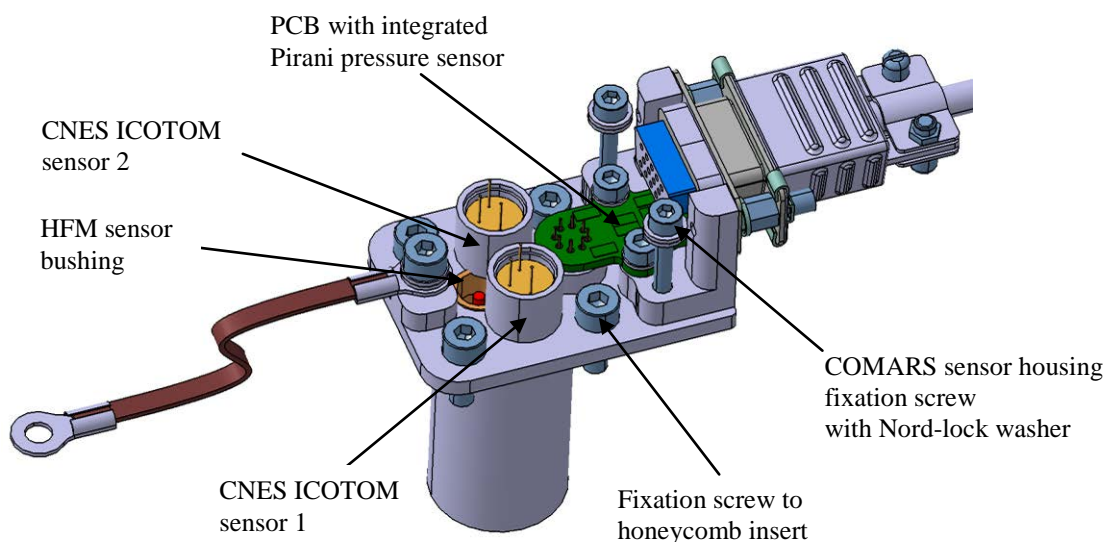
COMARS sensor assembly (bottom view with removed housing)
